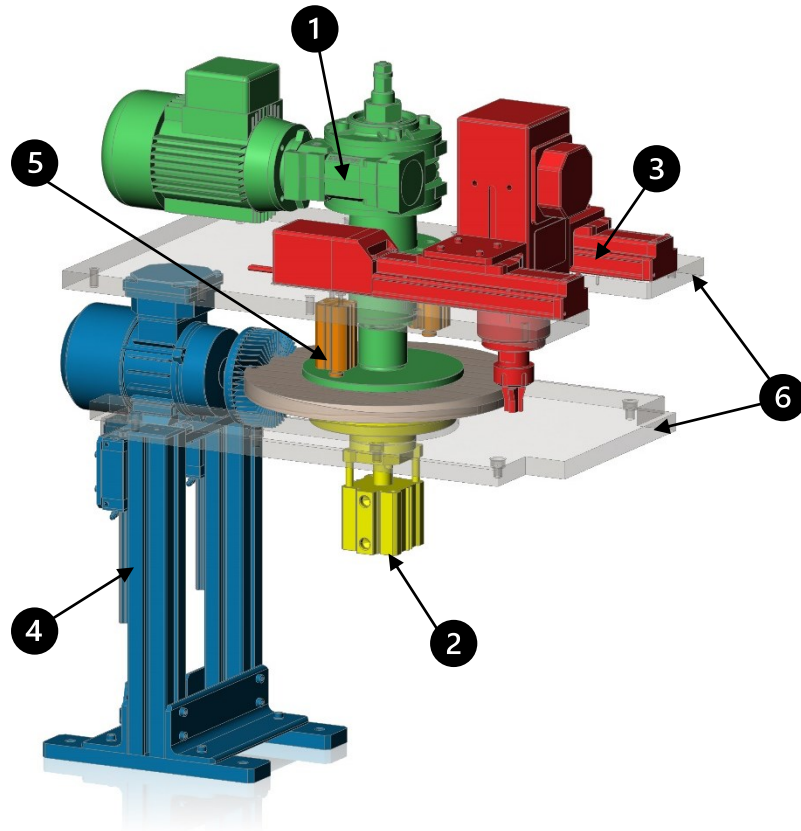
Part treatment unit. (1) Spindle. (2) Fixture-compensator. (3) Cutting unit. (4) Edge sanding unit. (5) Down pushing cylinders. (6) Steel plates, parts of the machine frame.
